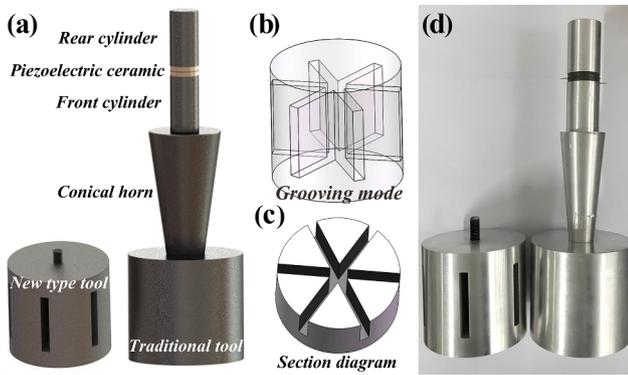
The traditional ultrasonic plastic welding systems and the new type tool. (a) Model schematic diagram. (b) Perspective diagram. (c) cross-sectional drawing. (d) physical picture.
